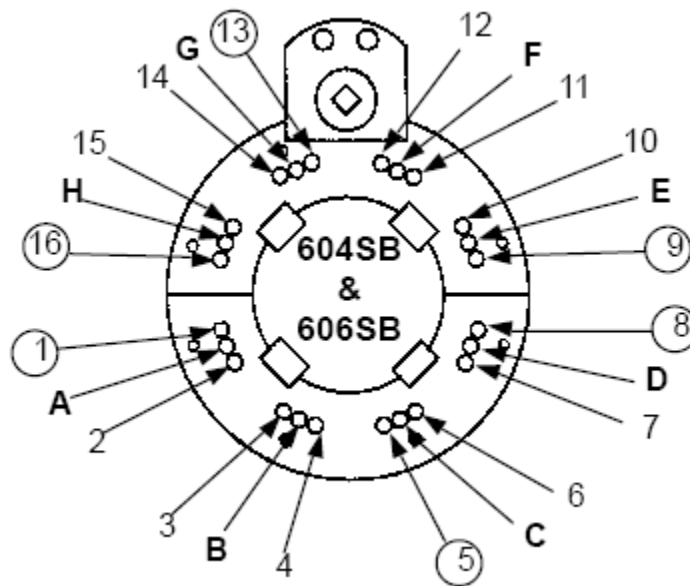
Locations of the Bearing Adjustment Screws - Part 1
